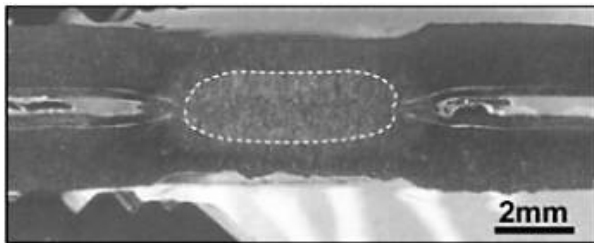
using point resistance welding (RSW) method to joining three-layer sheet [10]
